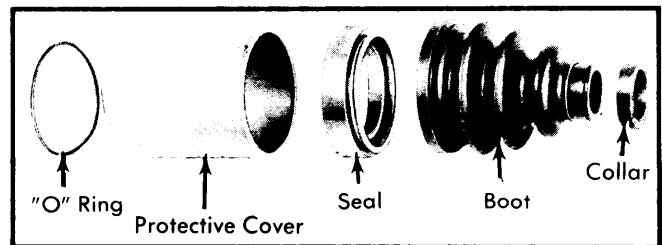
Disassembled View of Axle Shaft Protective Covers
